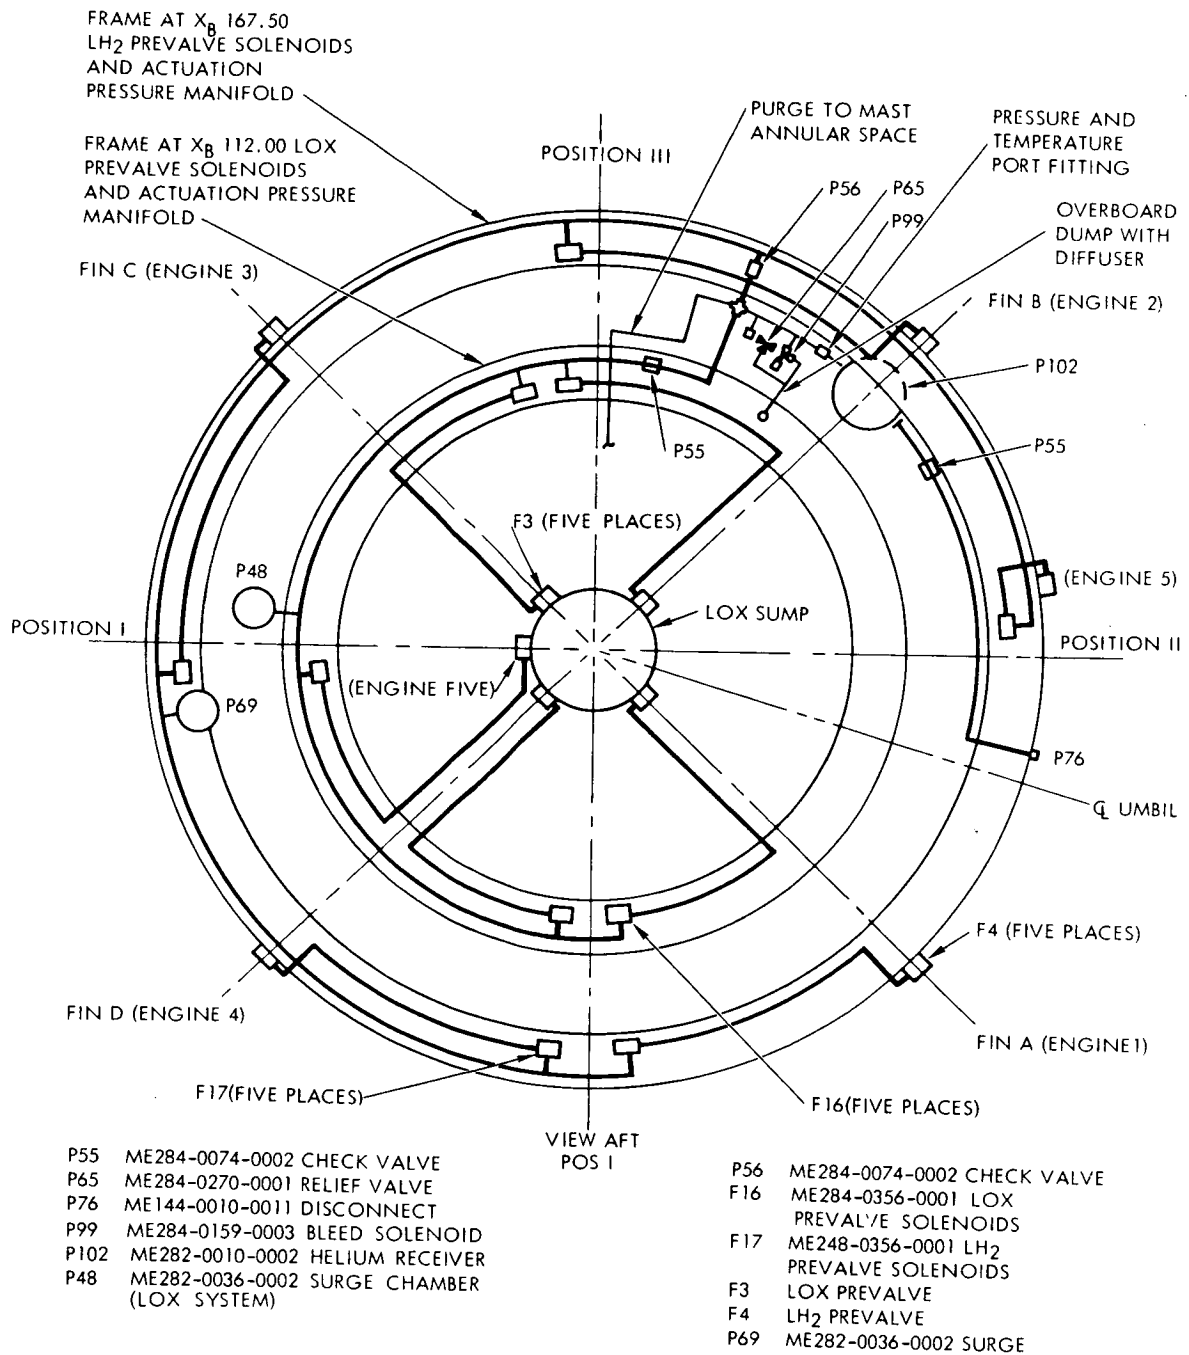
Engine Valve Actuation System (Aft View)
